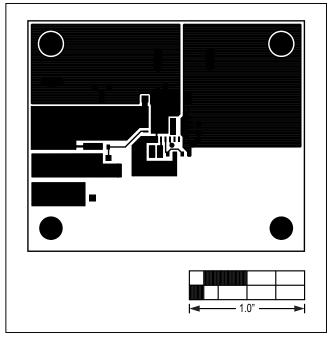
MAX17515 EV Kit PCB Layout—Component Side
